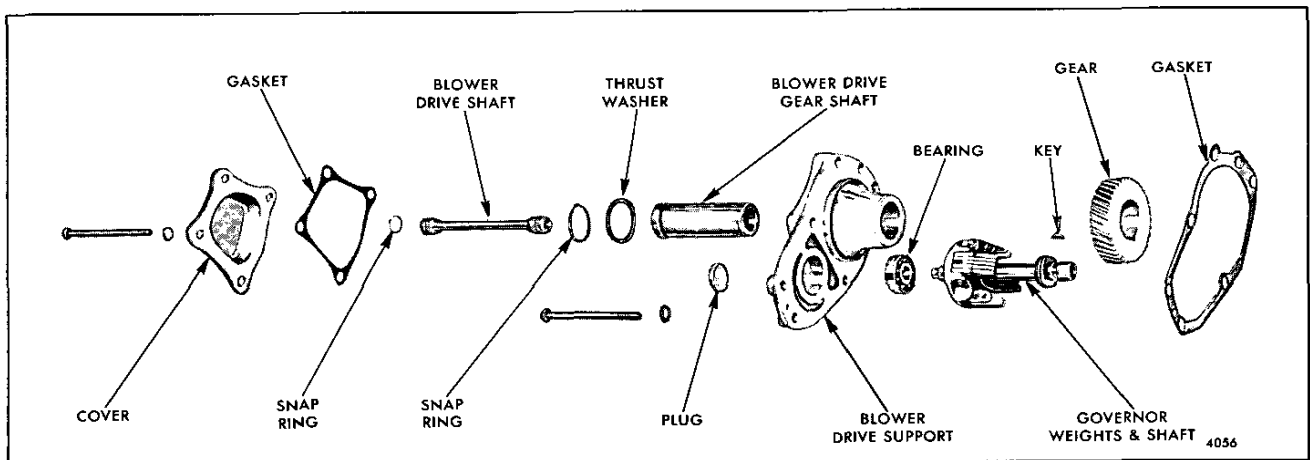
Blower Drive Support Assembly Details and Relative Location of Parts
